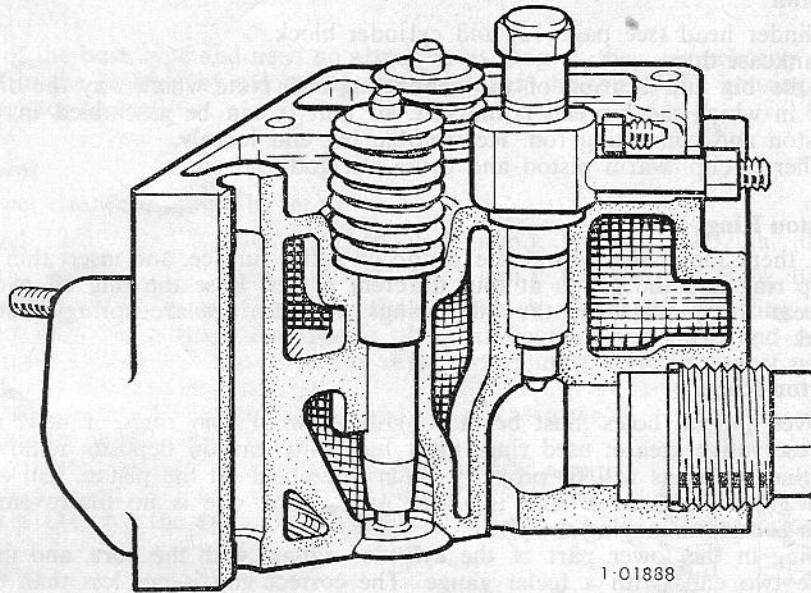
Cylinder Head (6/1 and 12/2 engines)
